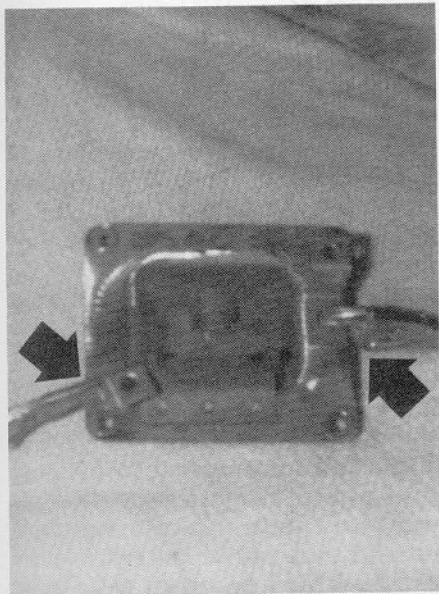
Vise Grips hold parts in place for welding.
